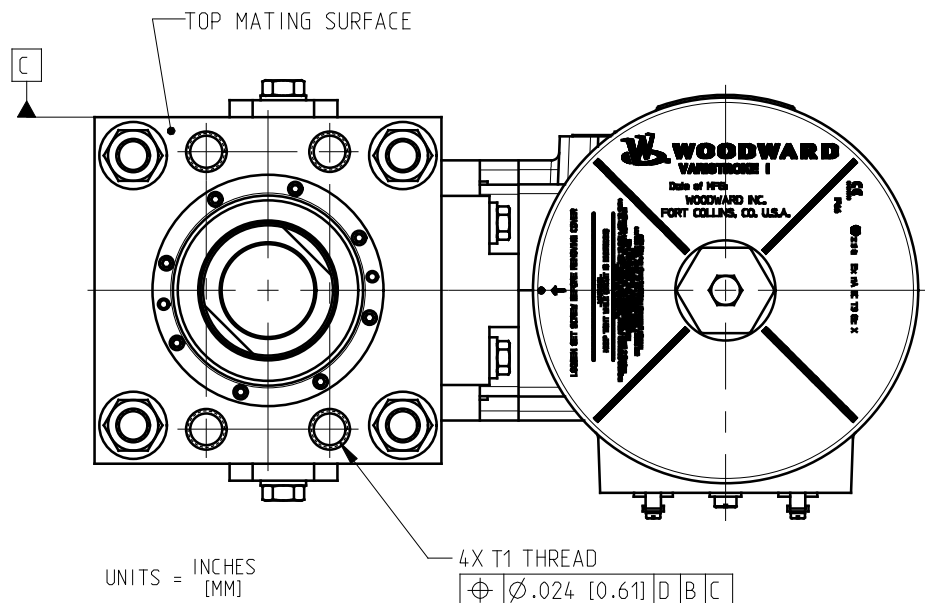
VS-I Integrated Product Installation Interface - Bolting Pattern and Installation Features
